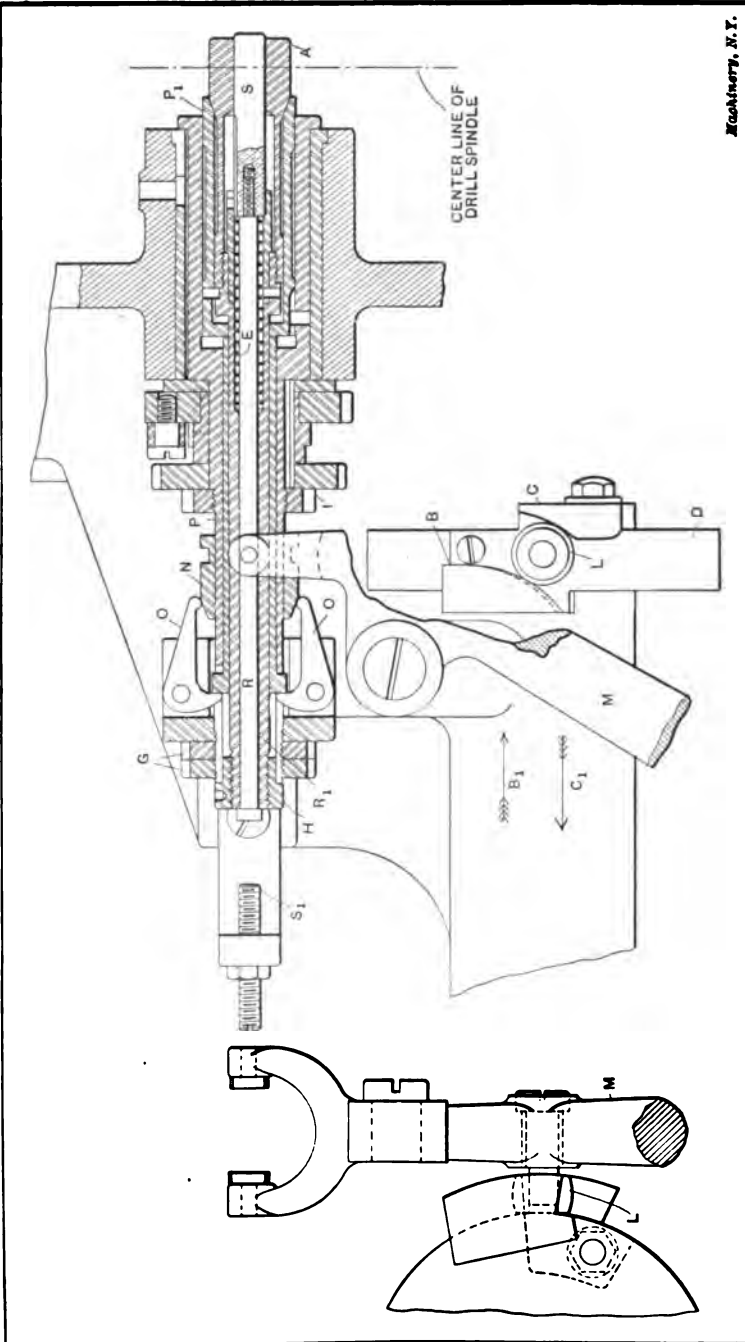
shows a sectional view of the index work-spindle, the section being taken on the line X-Y, Fig. 12. The spindle, as has been previously stated, is indexed, but otherwise remains stationary. The chuck *A* is closed by means of the cam *B*, which is fastened by screws to the drum *D*, while the cam *C* operates the lever *M* for opening the chuck. A roller *L*, attached to the lever *M*, and which is guided by the cam-blocks *B* and *C*, operates the lever *M* for closing and opening the chuck.
